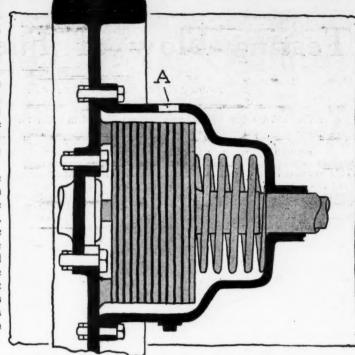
Clutch should be cleaned by introducing kerosene through A
